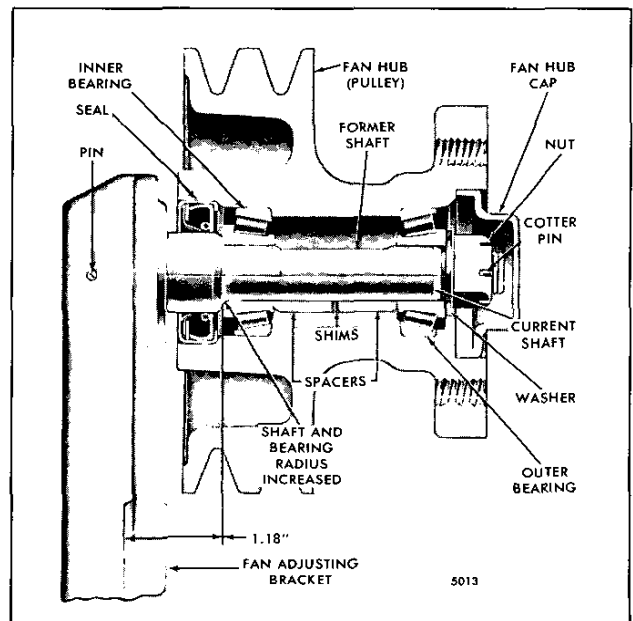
Shaft Type Fan Hub Assembly (6V Engines)
